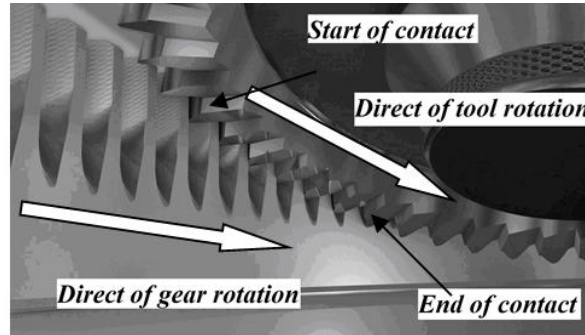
Diagram of cutter and work rotation during Power Skiving gear machining
